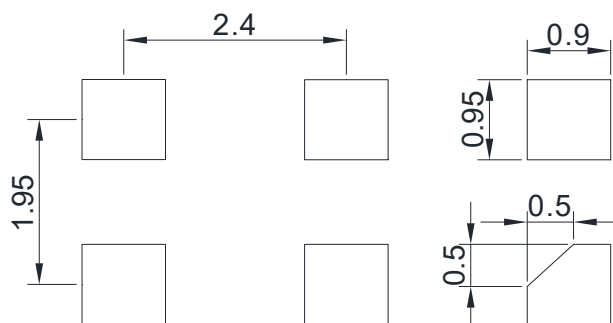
footprint of the sensor chips with LGA-3x6-6L package(unit: mm)
